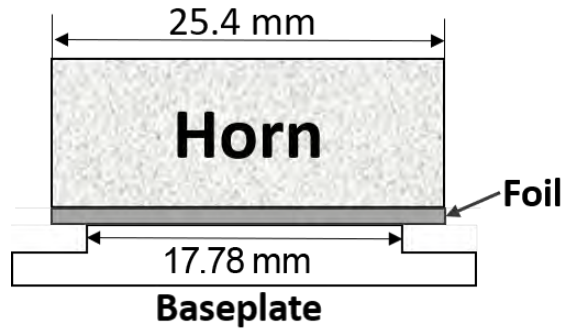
Head-on view of the horn in contact with the baseplate, creating a 20.3 mm wide weld.
